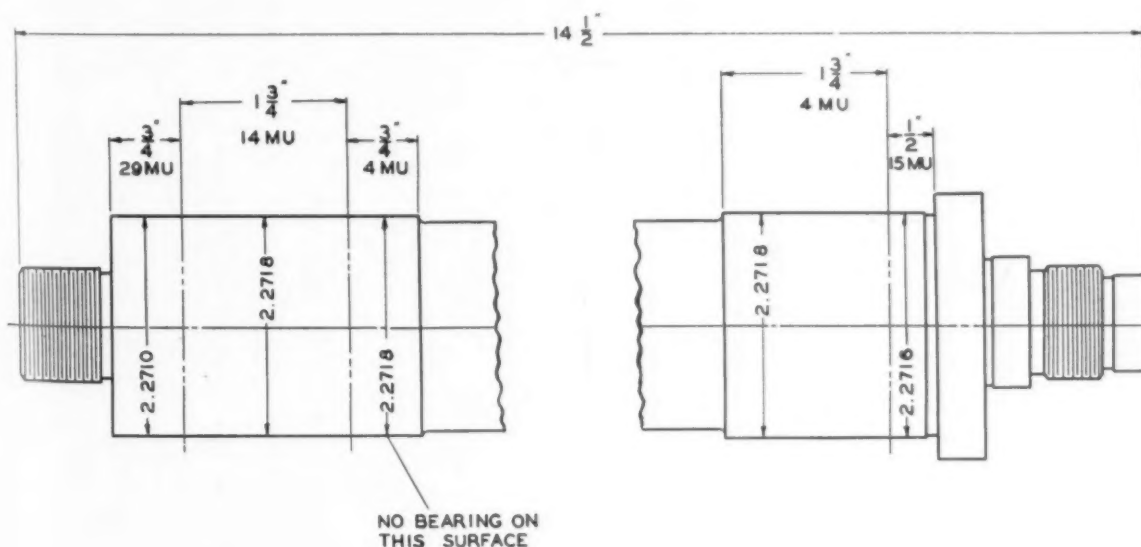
Live headstock spindle, 4140 steel, was nitrided 48 hr. Grinding to true removed 0.0005 in. skin. Surface
